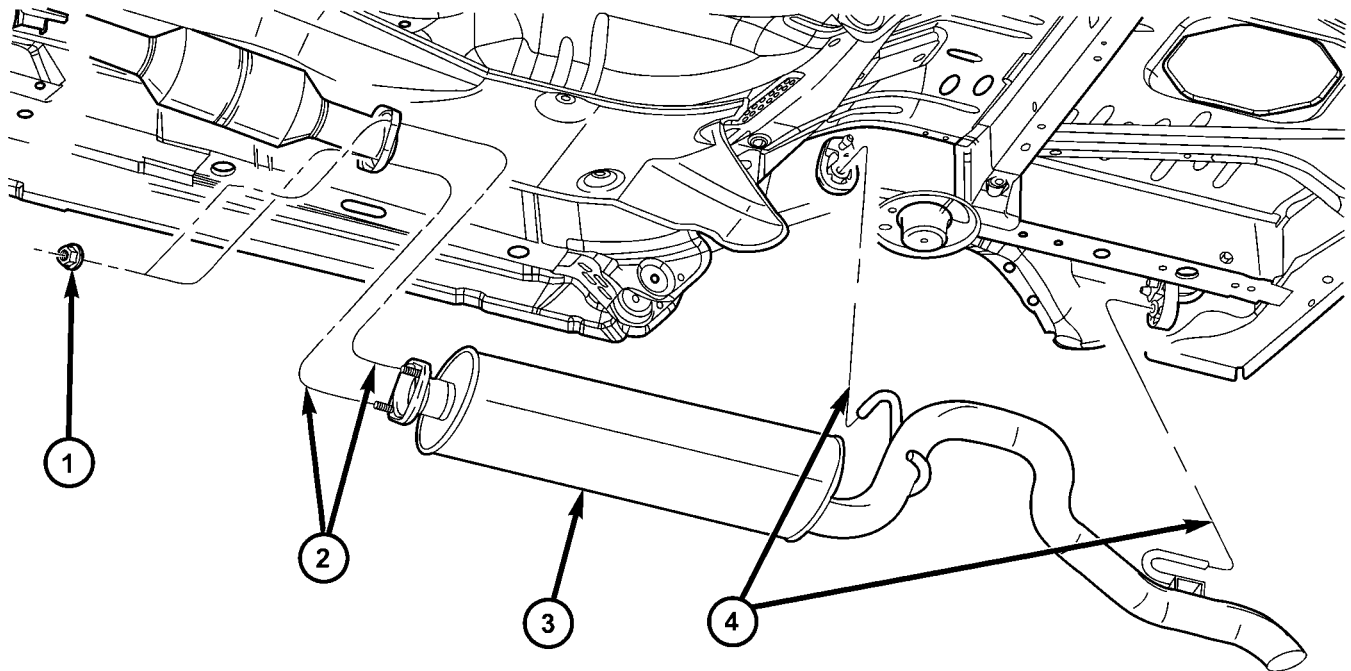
MUFFLER AND TAILPIPE ASSEMBLY
